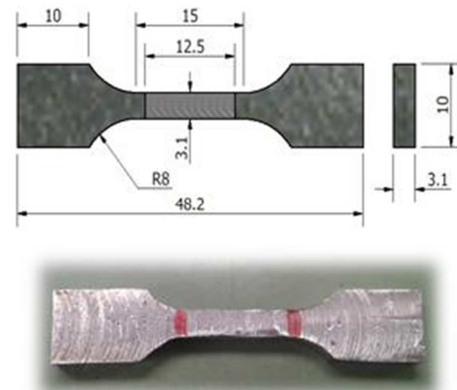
Tensile test specimen JIS Z 2201 No. 7
